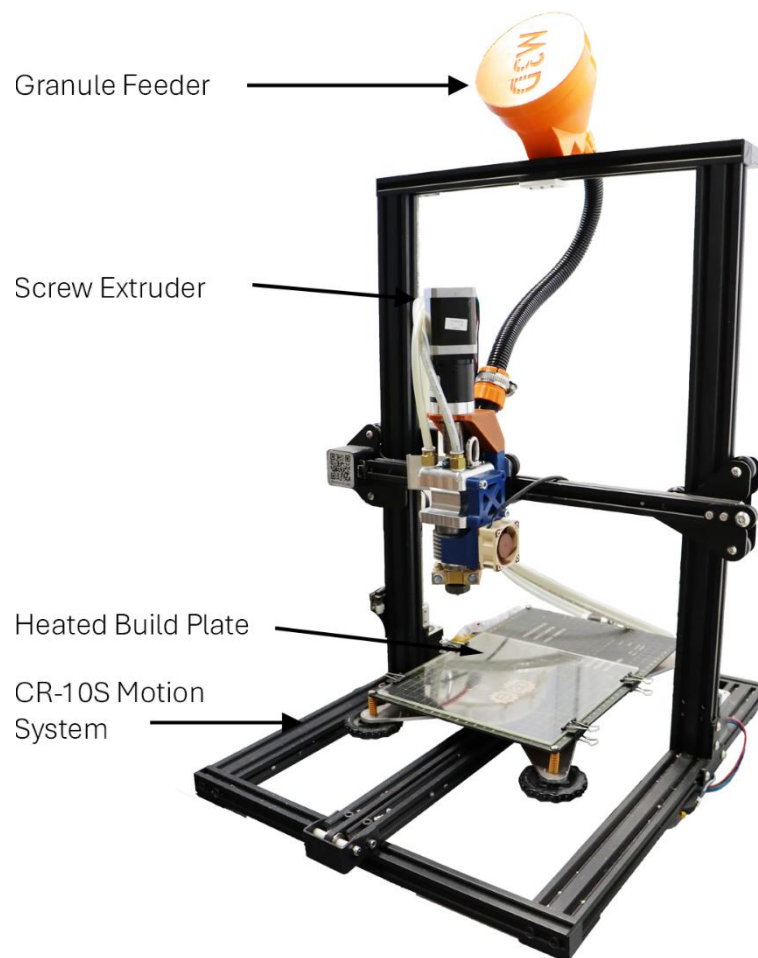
Assembled Extruder 4, mounted on CR-10s 3D printer.
